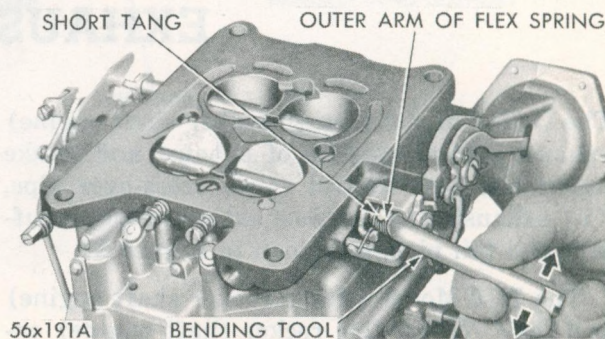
Bending Short Tang on Throttle Shaft Dog (Step 4-A)
